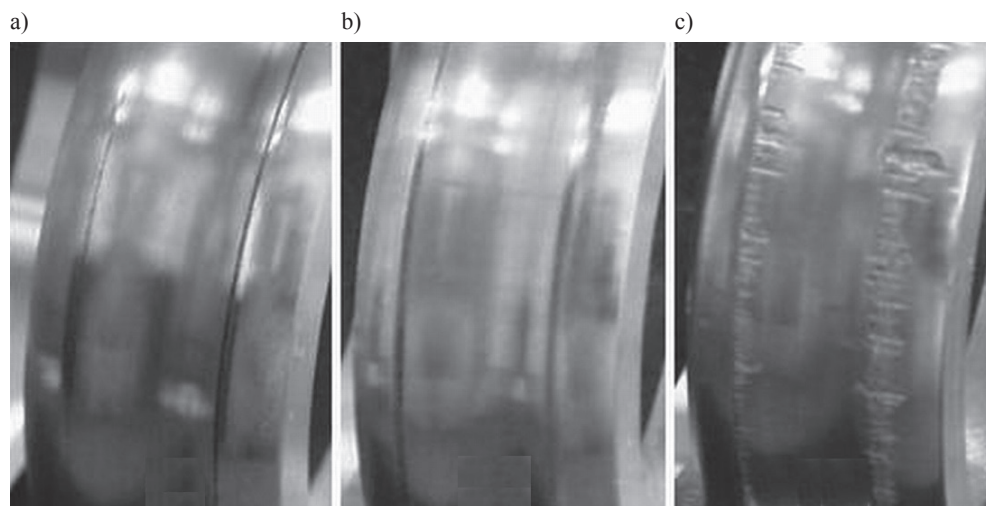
The gaskets after disassembly. Interferences  $\delta$ : a) 0.5‰; b) 1.0‰; c) 2.0‰.
